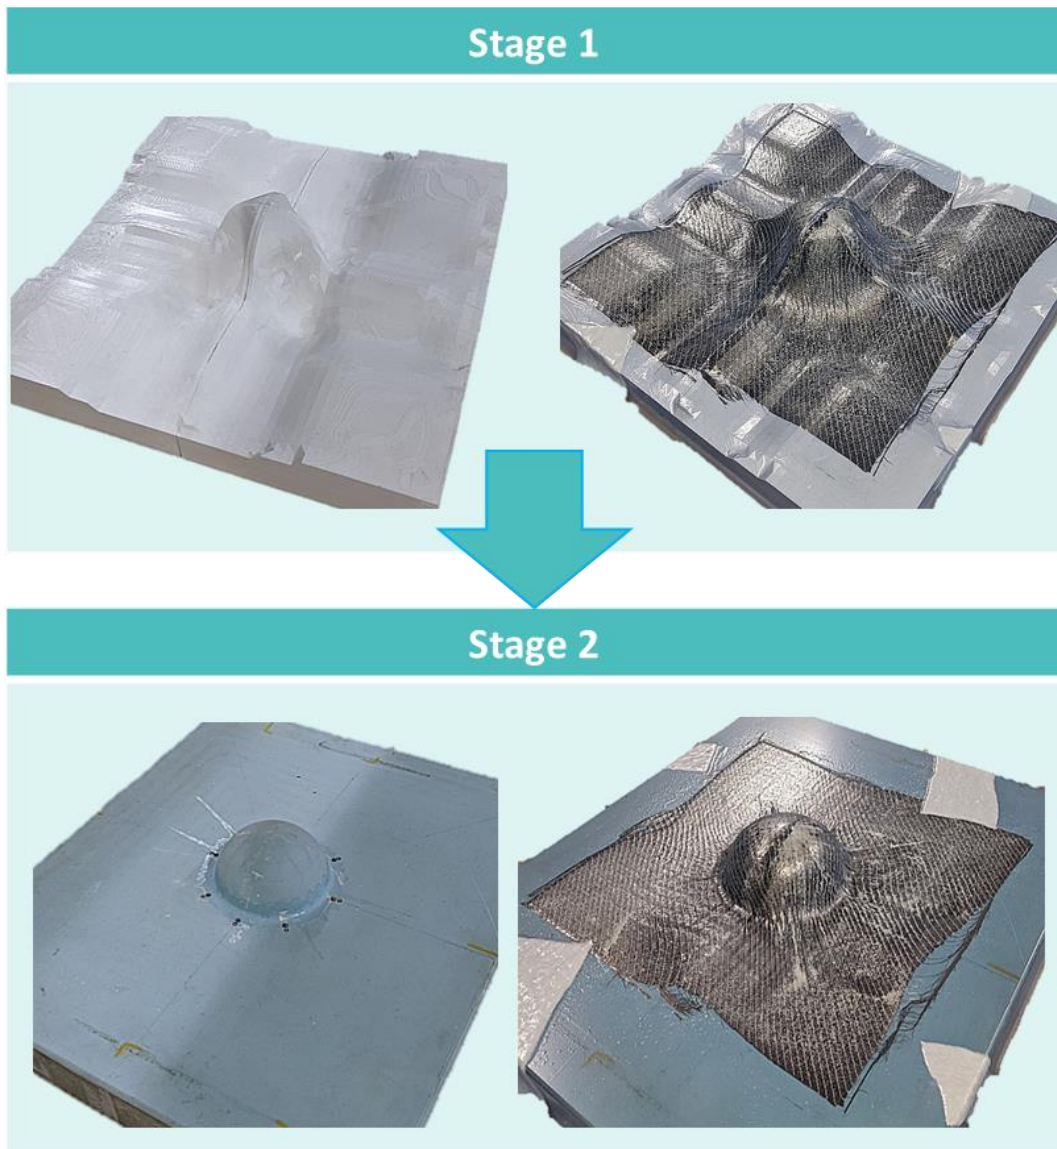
Multi-stage diaphragm forming. Example form for stage 1 and stage 2 with a hemisphere mould tool (mould tool on the left and moulded component on the right)
